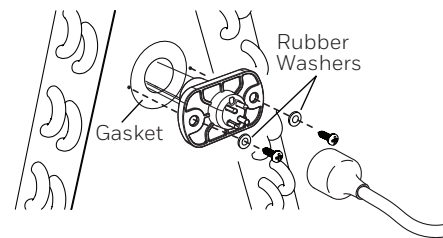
Insert lamp into delta plate knockout and secure with screws and washers. Connect remote lamp extension cord.
